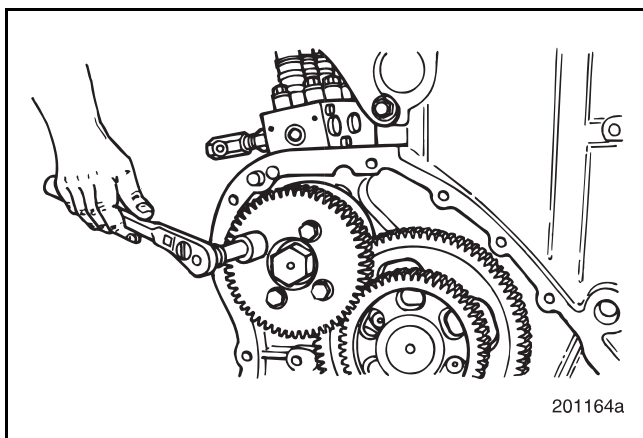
Fuel Injection Pump Drive Gear Removal
